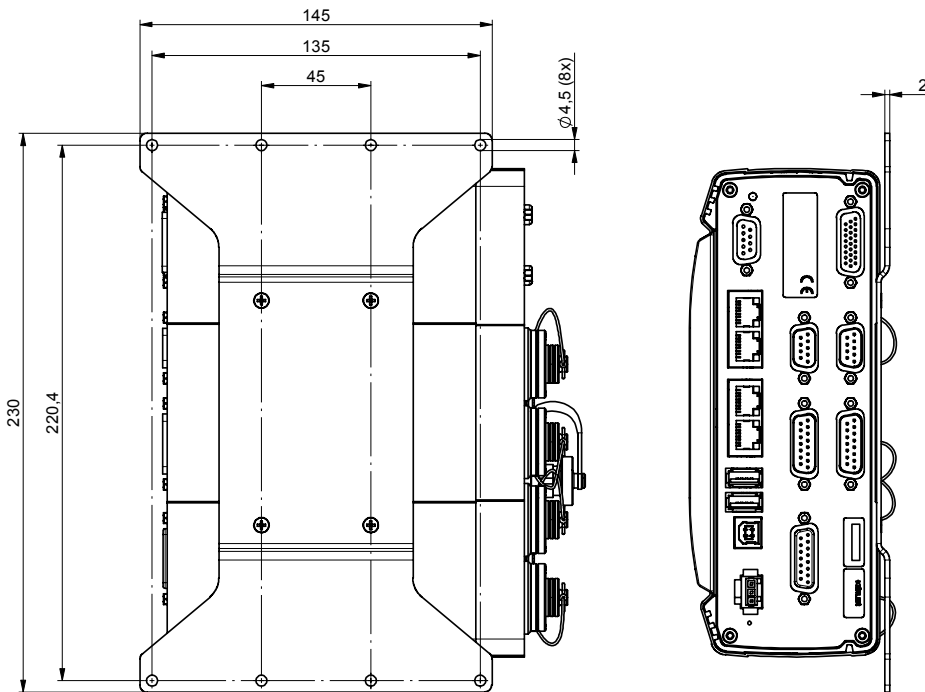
Dimensions ComoNeo mounting plate 7.511.368
